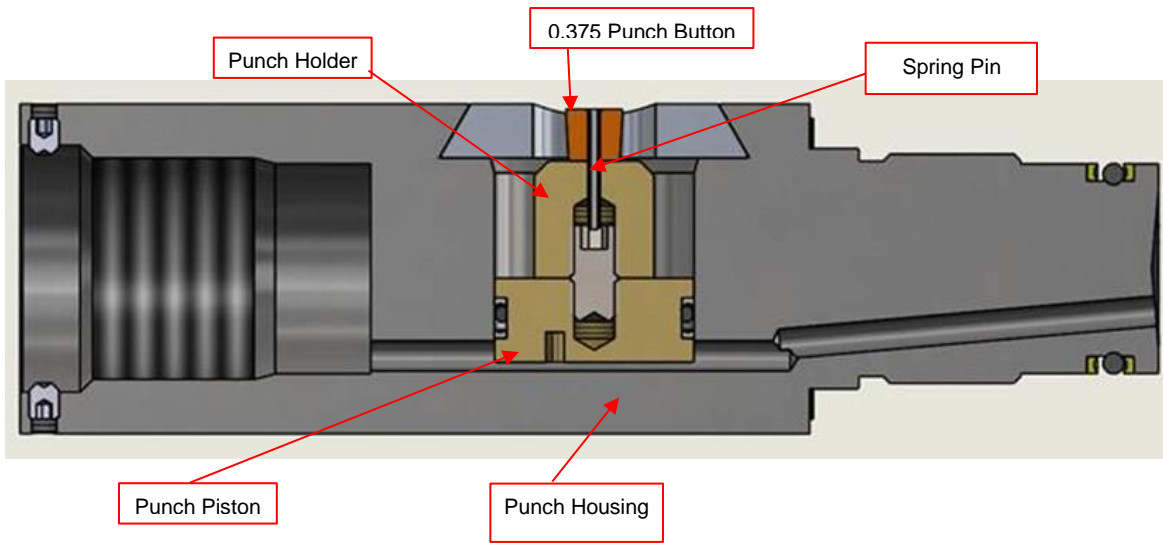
Cross section image of Punch Heads, kaseum part numbers 2326 and 2656
